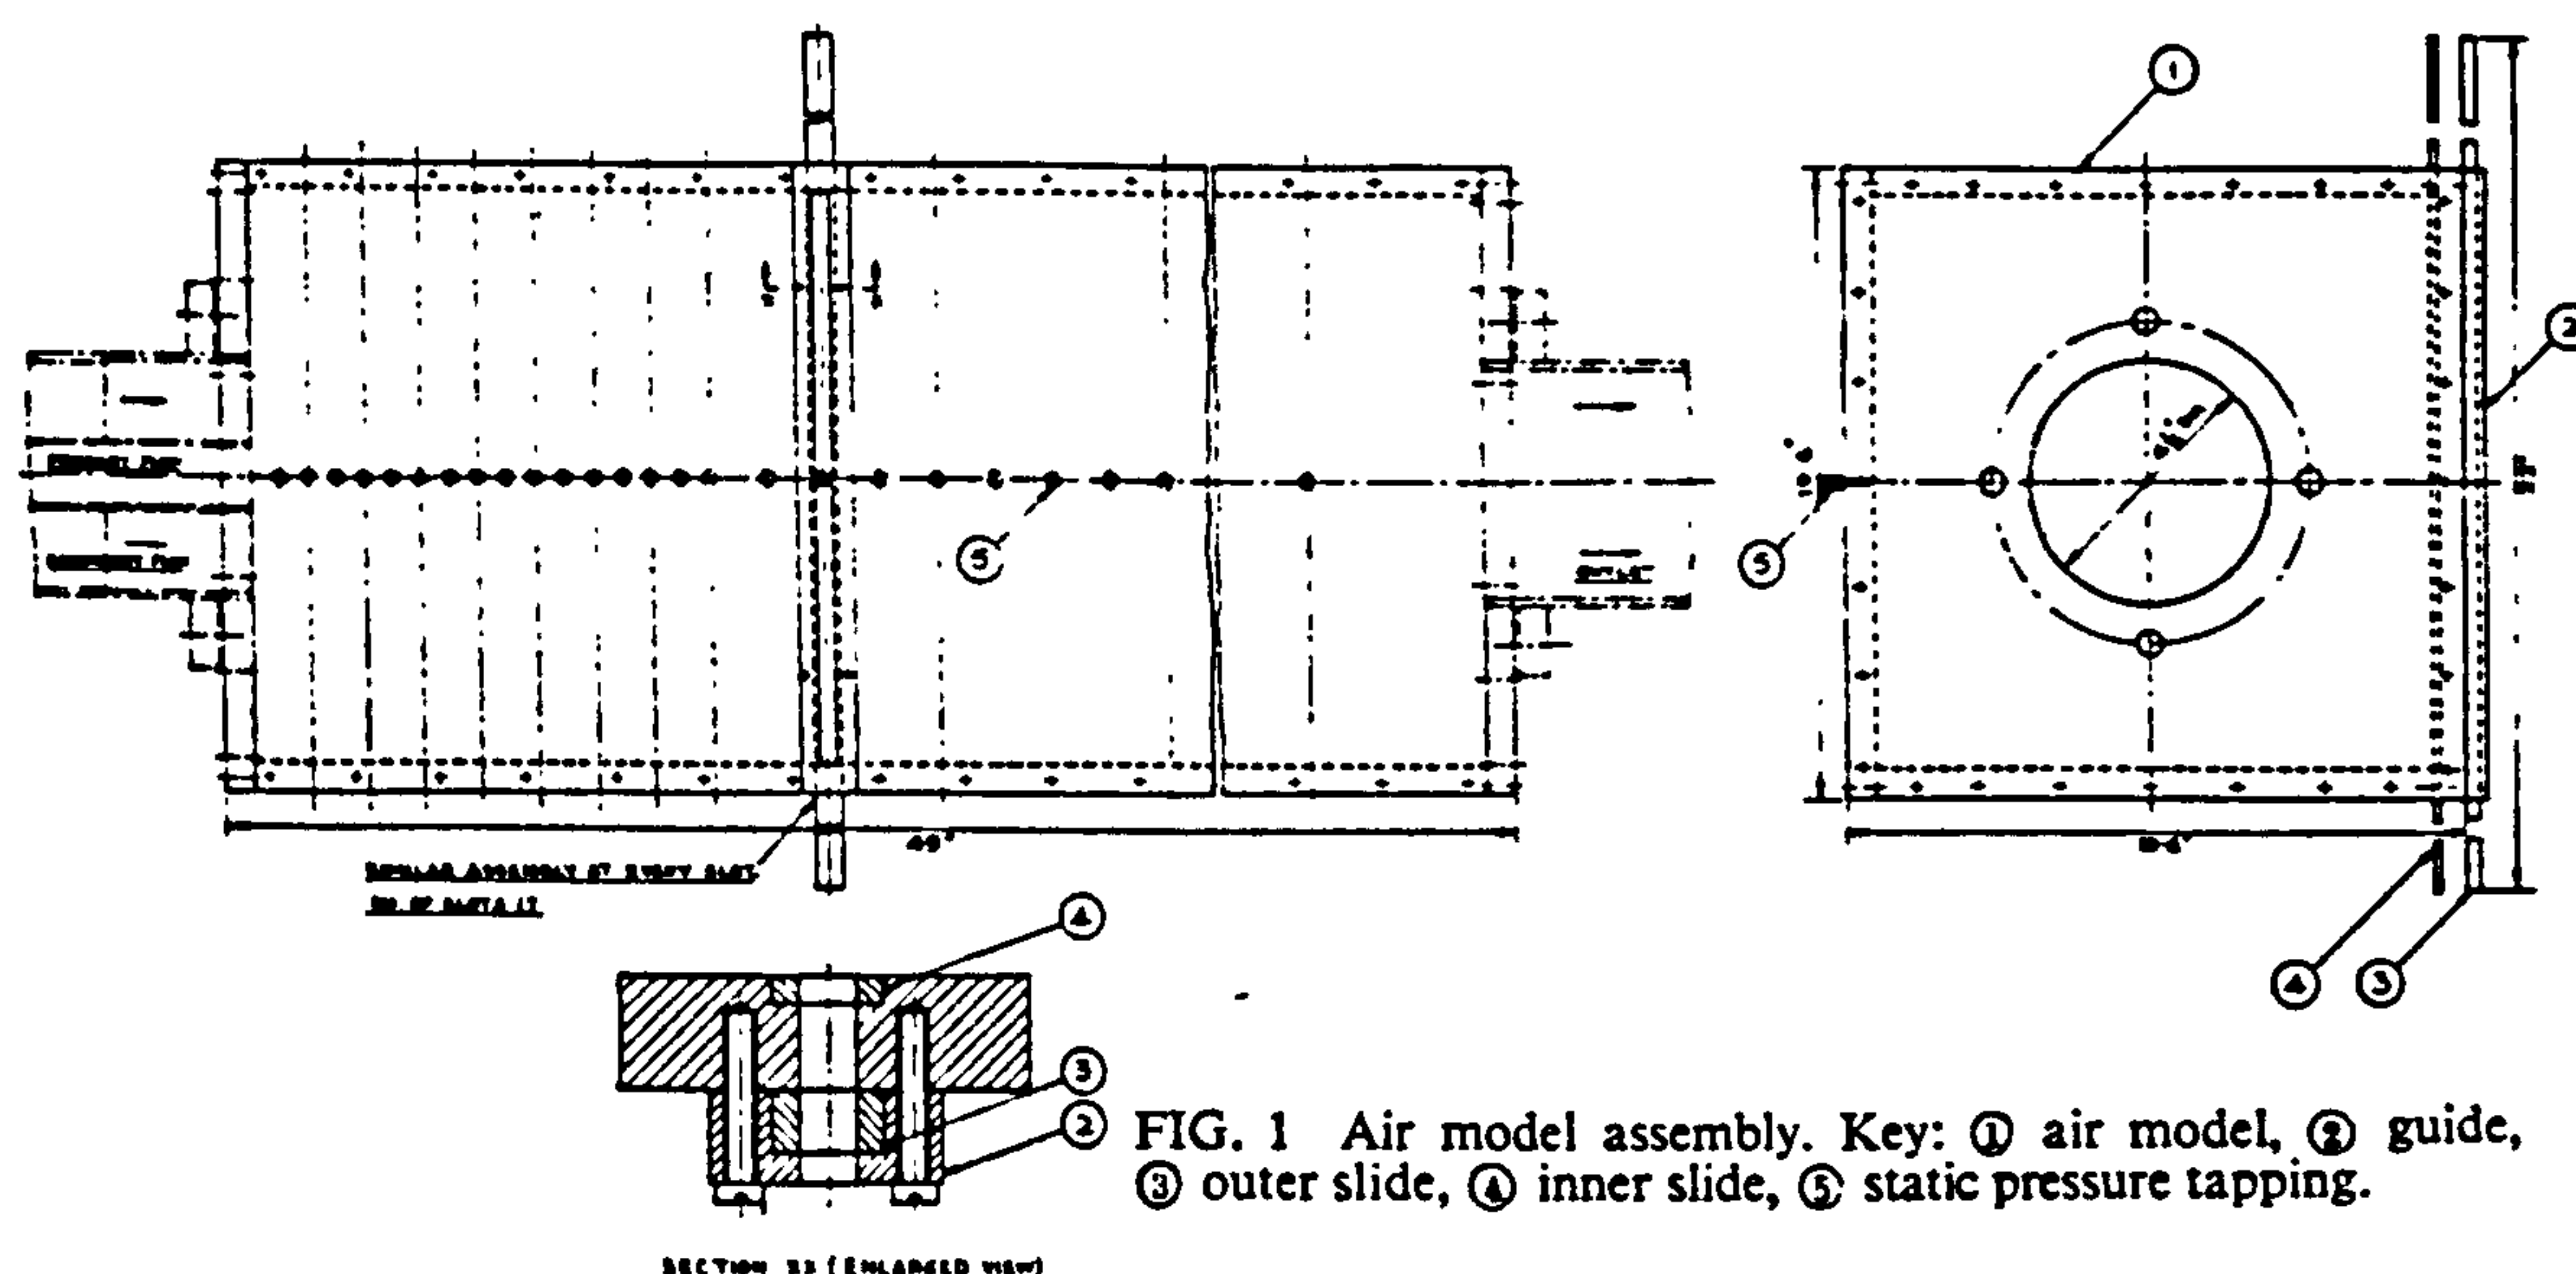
Air model assembly. Key: ① air model, ② guide, ③ outer slide, ④ inner slide, ⑤ static pressure tapping.
